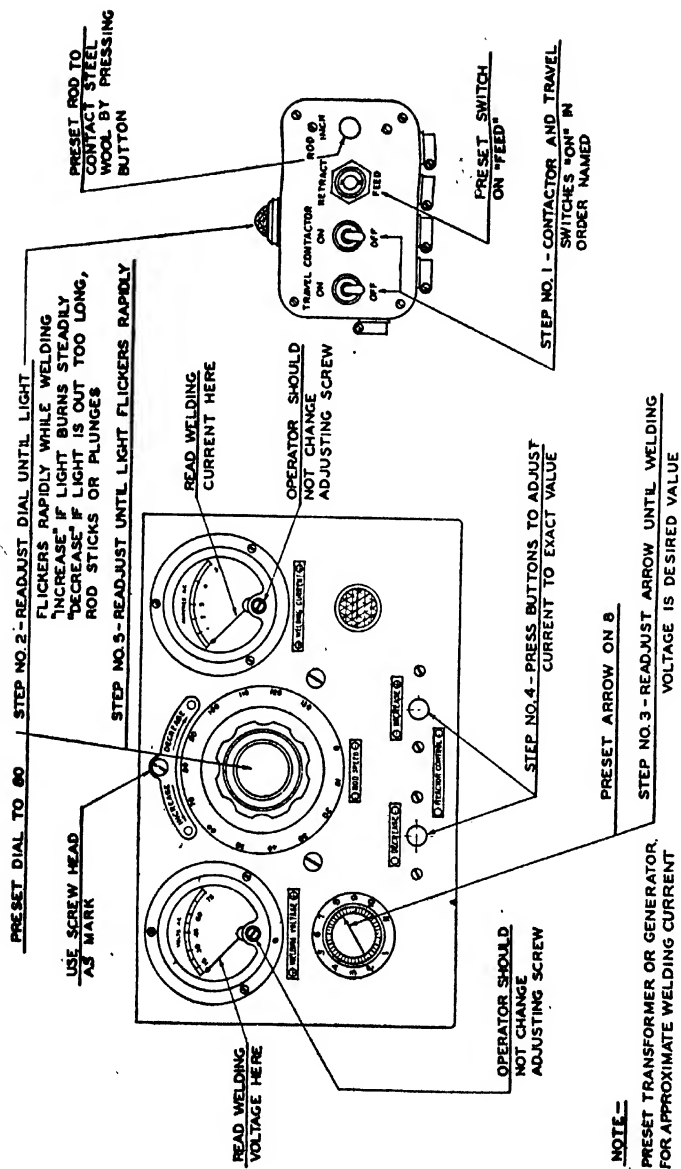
SEQUENCE OF OPERATING CONTROLS FOR UNIONMELT WELDING
